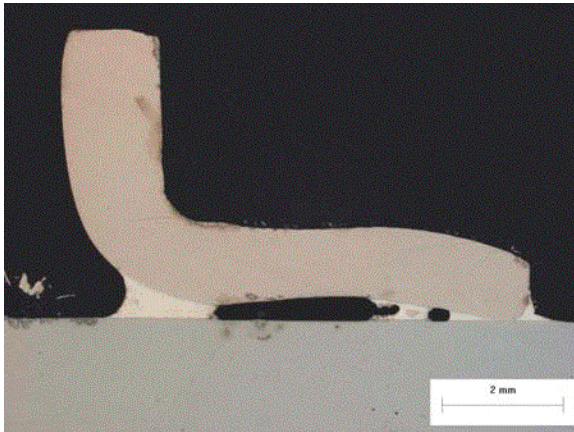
Assembly #1 Braze Joint Voids with Bowed Fin Leg
